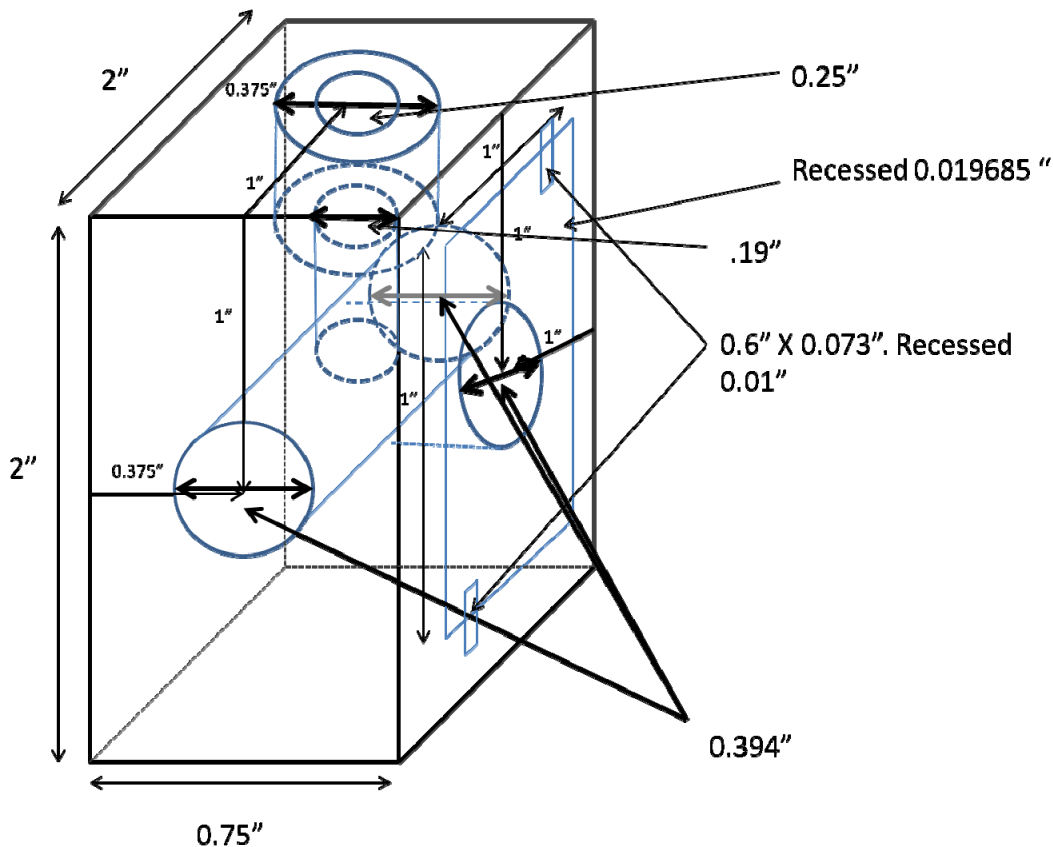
Drawing of the back half of the test chamber. This half of the chamber houses the expansion volume and is machined from a single block of stainless steel.
